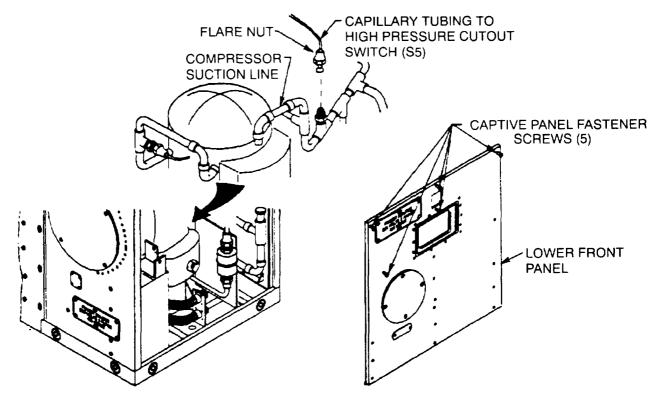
Flare Nut Disconnect for High Pressure Cutout Switch (S5)
